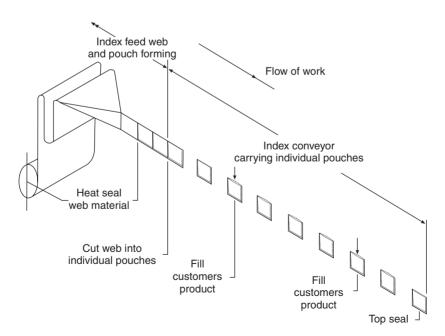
Horizontal form/fill/seal sachet/pouch machine.
